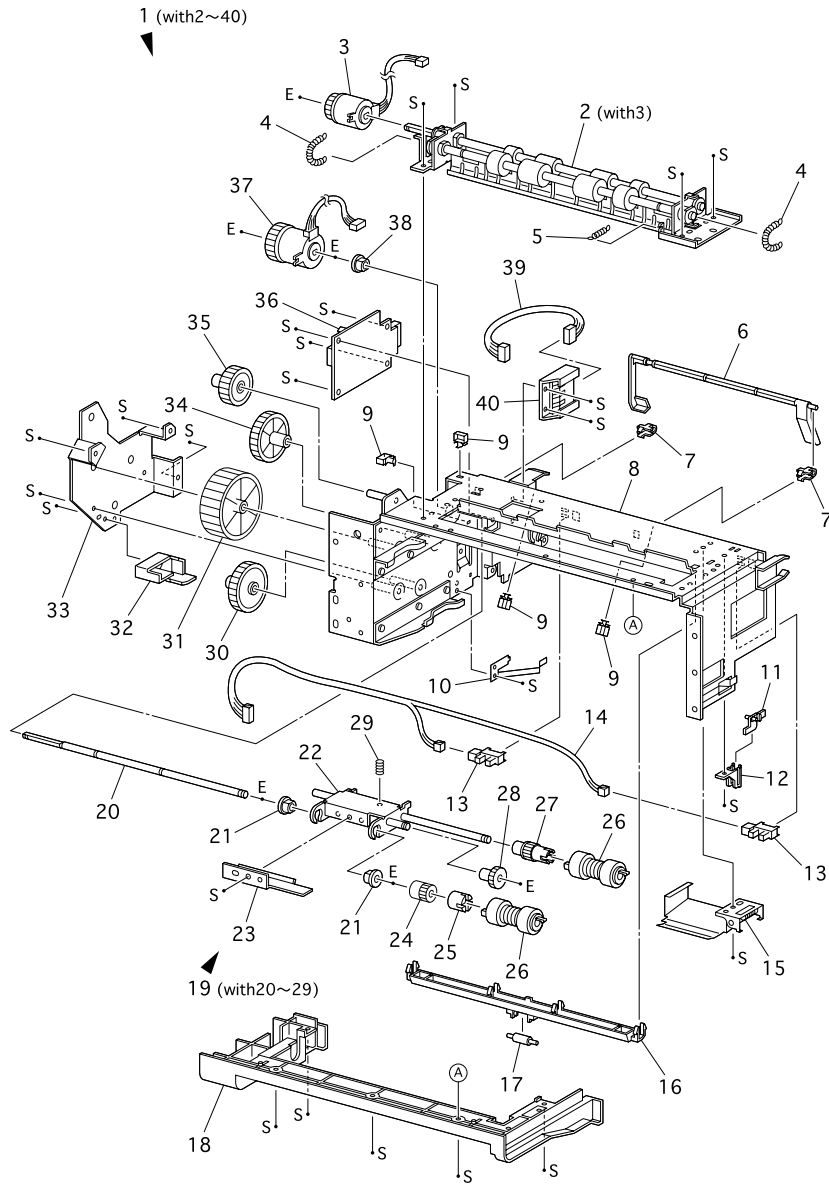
Exploded Diagram for Large Capacity Paper Unit II
